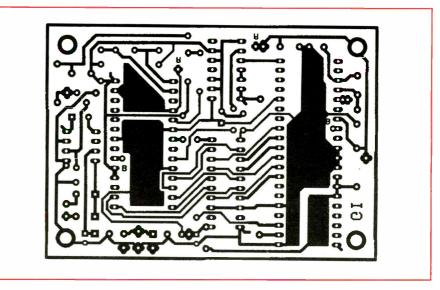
Actual-size artwork for fabricating printed-circuit board for SOM. Pc boards for both options are identical.
